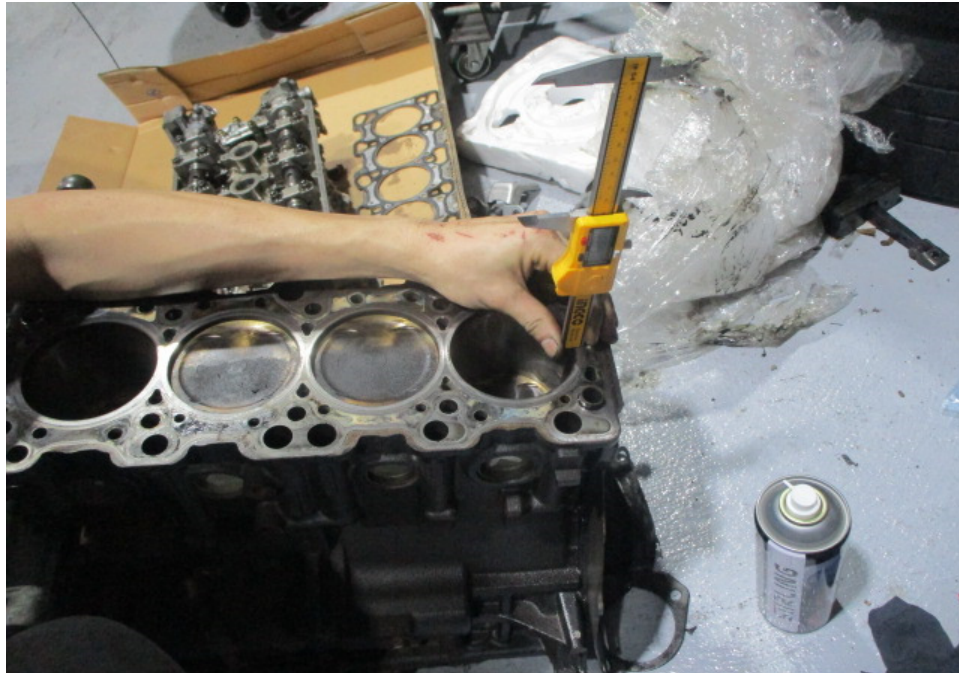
shows measurement of the stroke of cylinder 4 of the Mitsubishi engine that I had inspected. The bore and stroke measurements of the Mitsubishi engine were carried out using a digital Vernier Caliper that was calibrated before the start of measurements.
